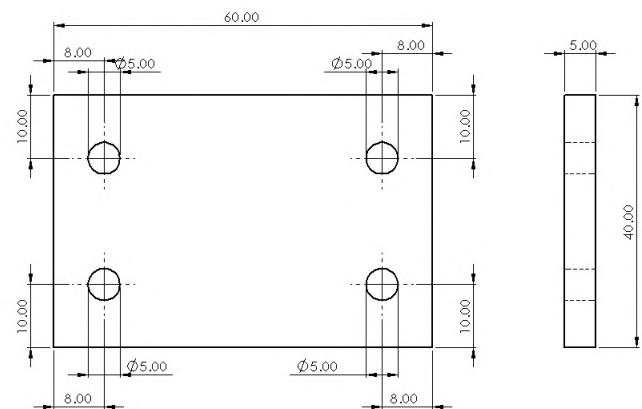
2D Drawing of the 2nd spring holder (All dimensions are in mm)
